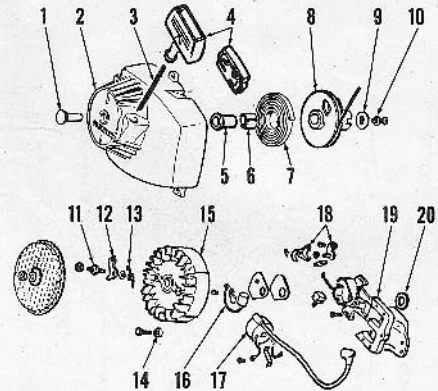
Exploded view of magneto and rewind starter. Steel bushing (5) and nylon liner (6) is used instead of bronze bushing used on early models. Some models use one pawl assembly (11, 12 & 13) and one balance weight (14); others are equipped with two starter pawl assemblies.
